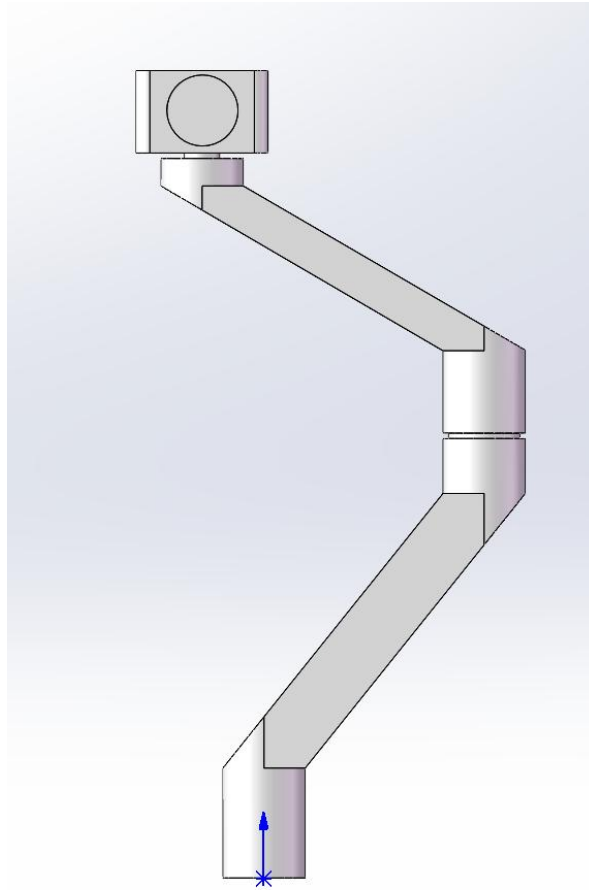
Side view of the adjustable camera mount showing joint configuration and range of motion.
